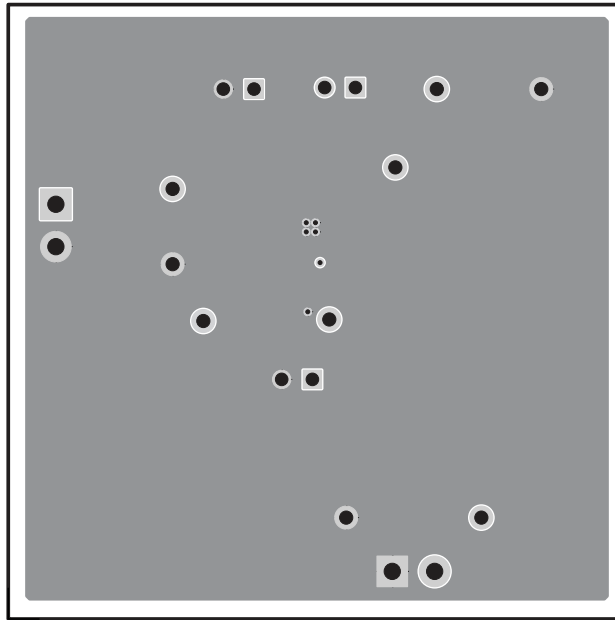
TPS54478EVM-037 Bottom-Side Layout
